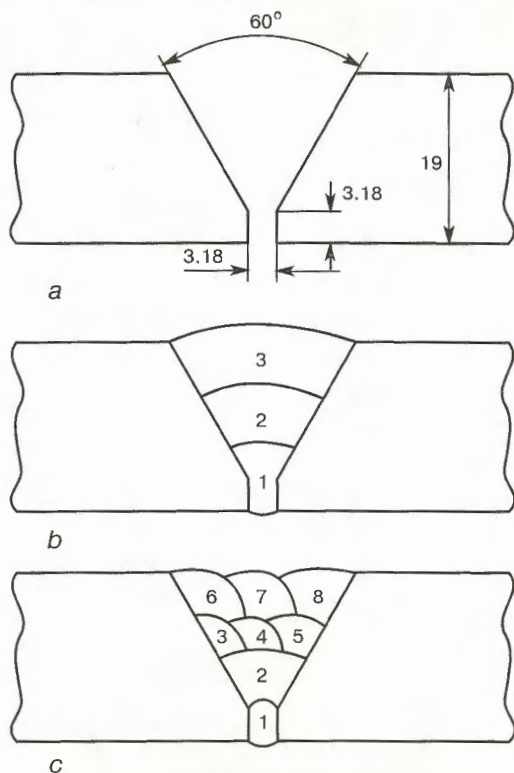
Shape of edge preparation (a) and sequence of groove filling in welding using version I (b) and II (c).
